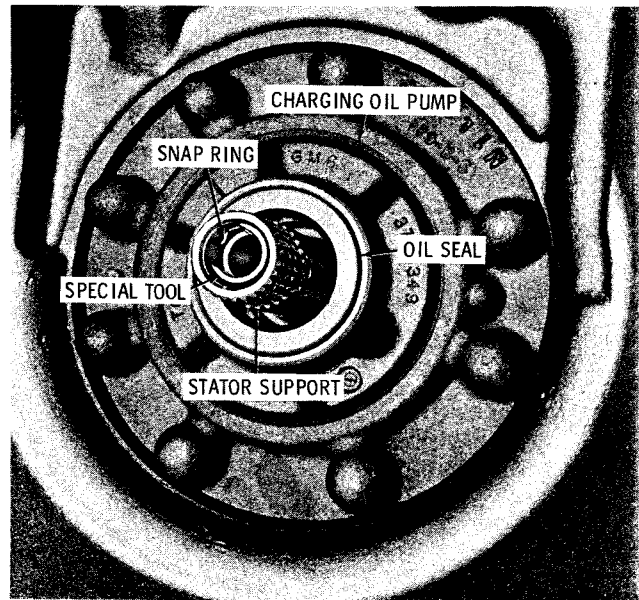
Special tool engaging converter snapping (TC 250)
